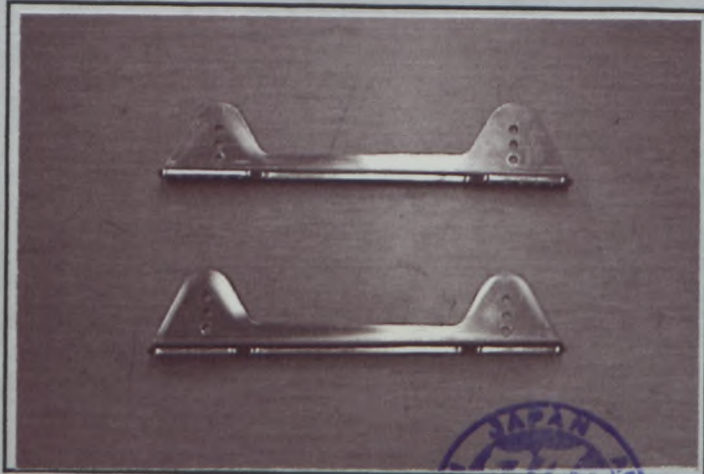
SEAT MOUNTING BRACKET (D.SIDE)
